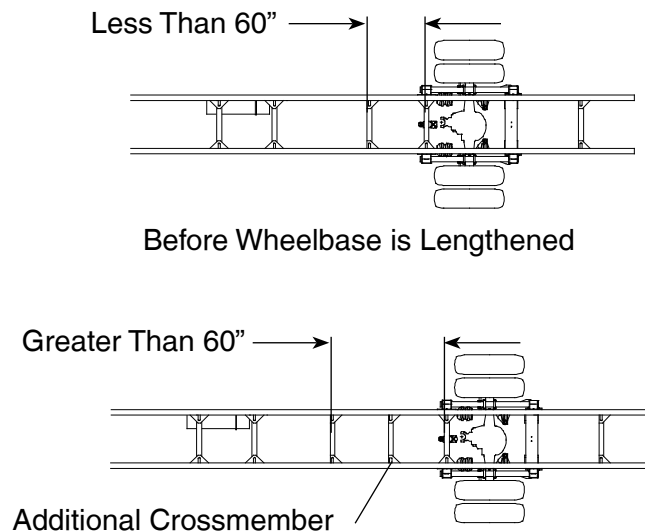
4. Crossmember Added when Distance Exceeds 60 inches (1524 mm)
